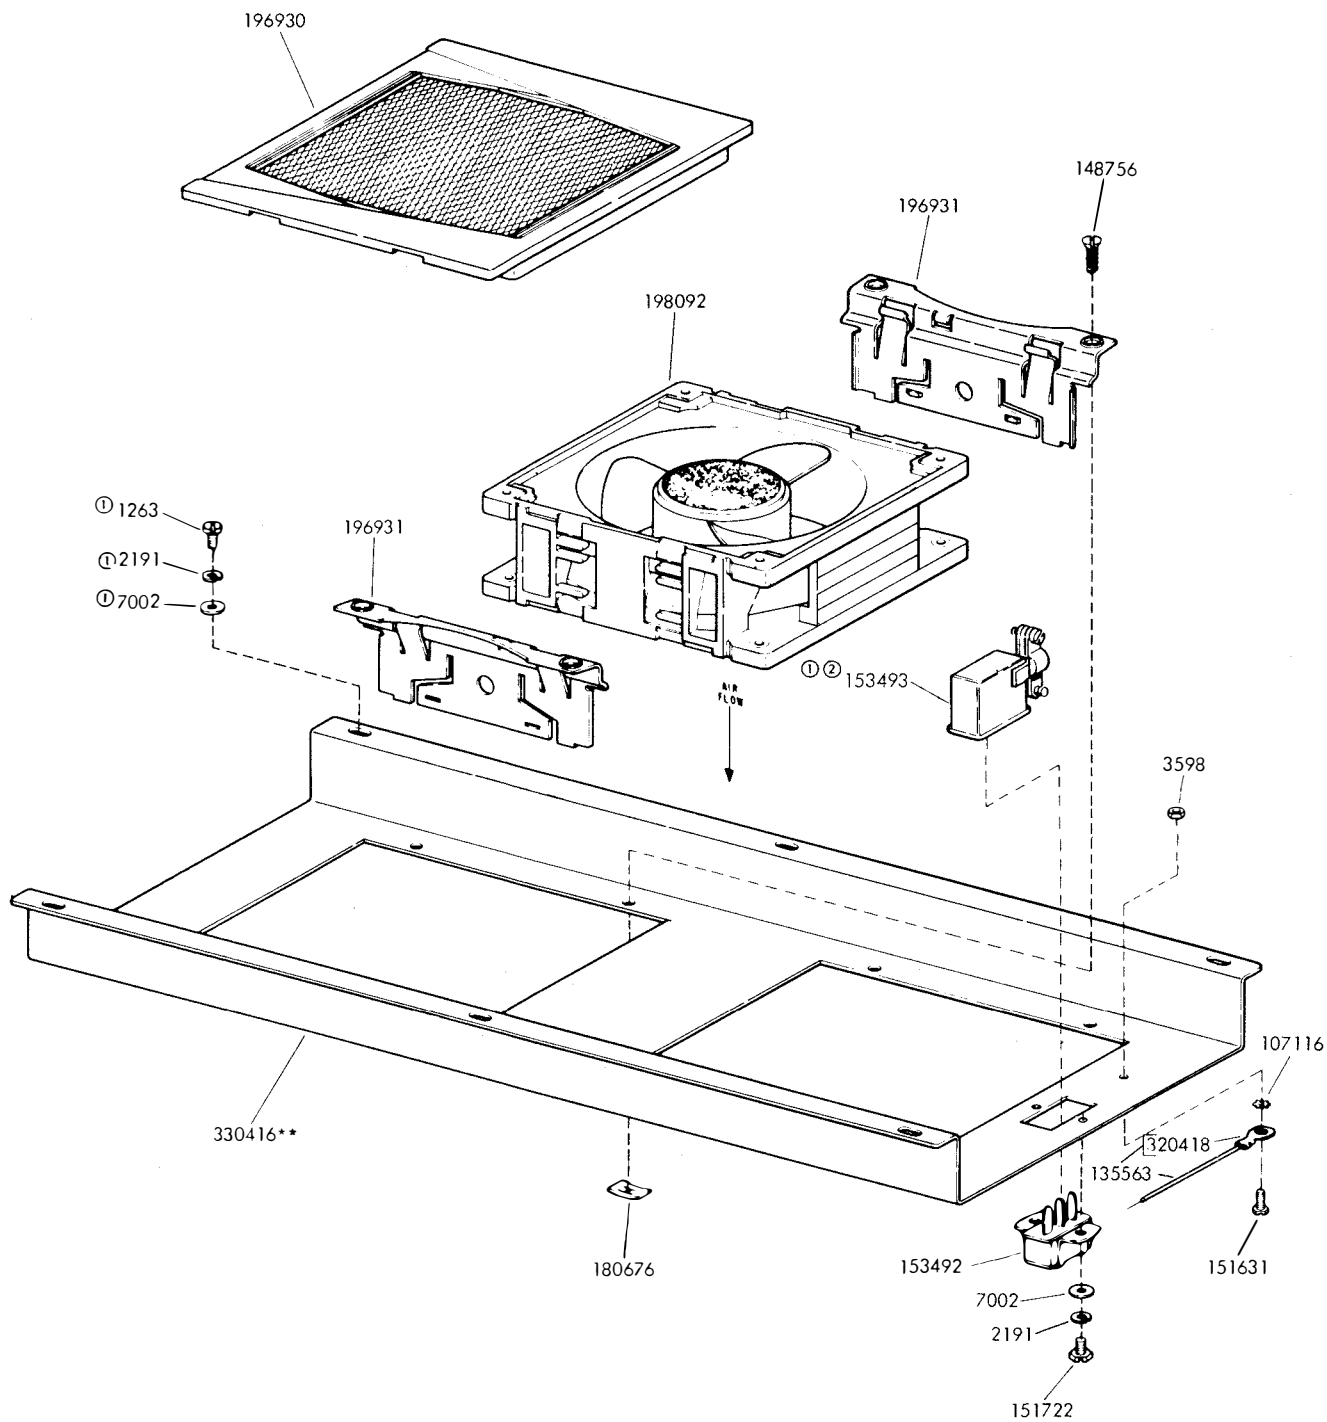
CABINET PLATE AND MOUNTING BRACKETS
